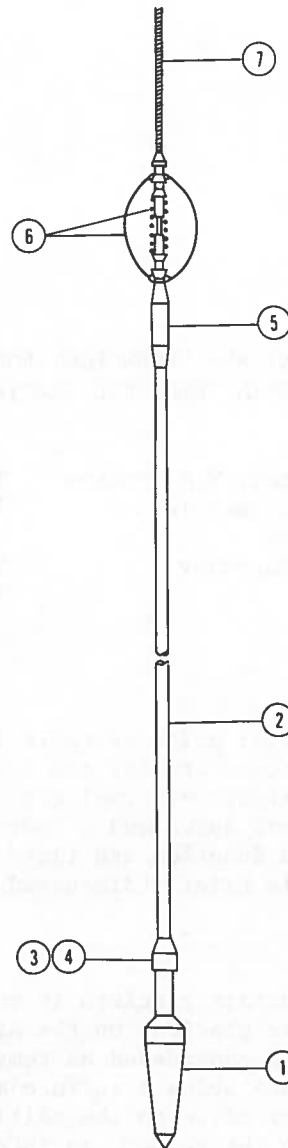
Electro-thermal "Needle" drill. (1) Conical heater bit. (2) Central pipe. (3) Coupling nut. (4) Connector. (5) Cable connector assembly. (6) Spring loaded hole centering device. (7) Electro-mechanical cable.
